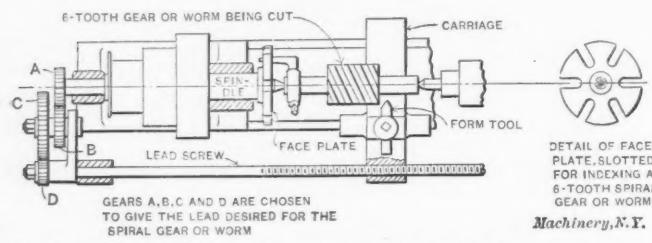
The Lathe Method of Planing Helical Teeth in Gears or Worms.
